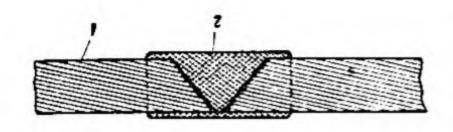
Appearance (section) of soldered joint in an aluminium conductor:
